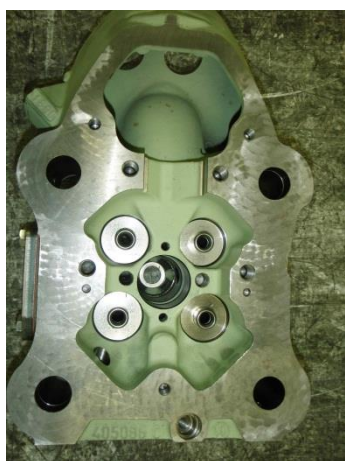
Current design of the "F" cylinder head of Type 6 engines – CAN BE AFFECTED
